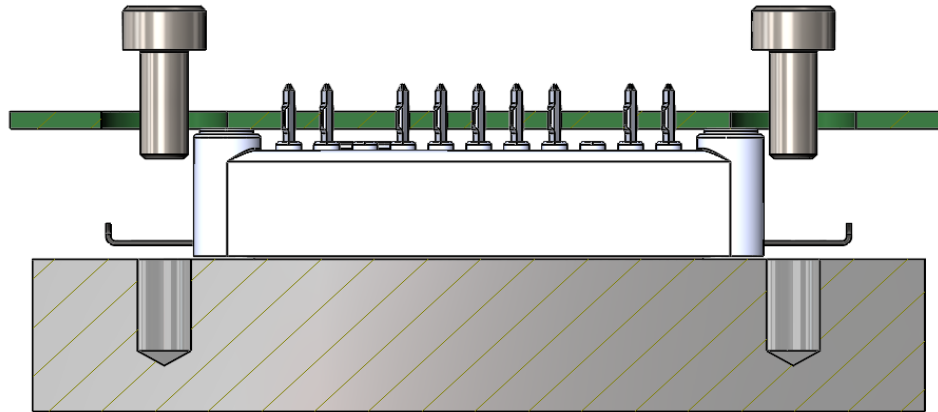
Module with cross-sectional view of heatsink and PCB with module mounting screws
